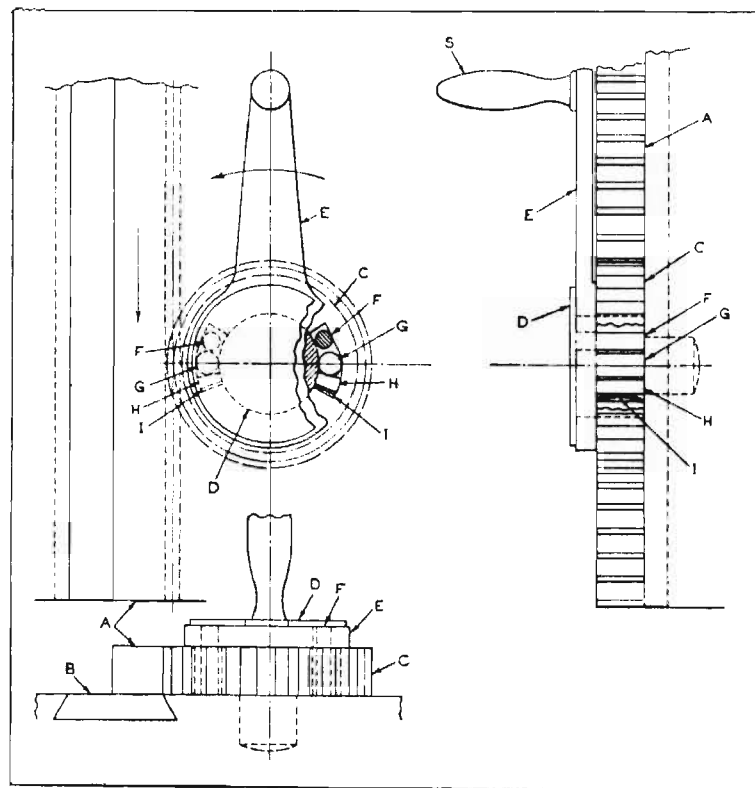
(Left) End and Plan Views of Rack-and-pinion Mechanism with Self-locking Feature; (Right) Side View of Mechanism.
